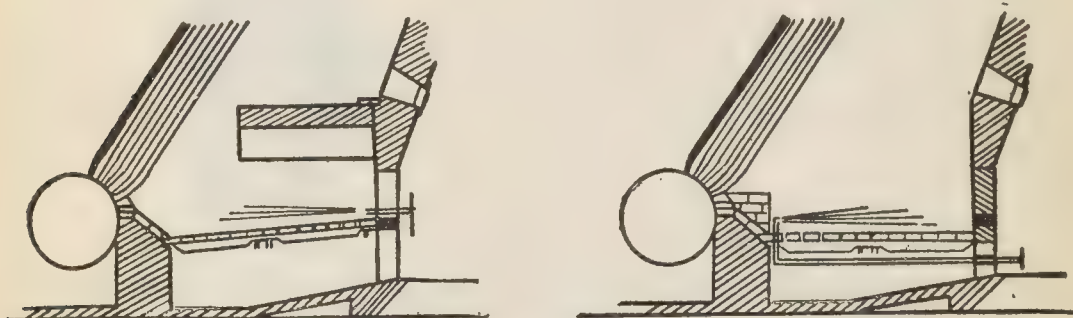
,918 and 8,919.—Arrangement of oil furnace for water tube boilers with horizontal and vertical baffles.
